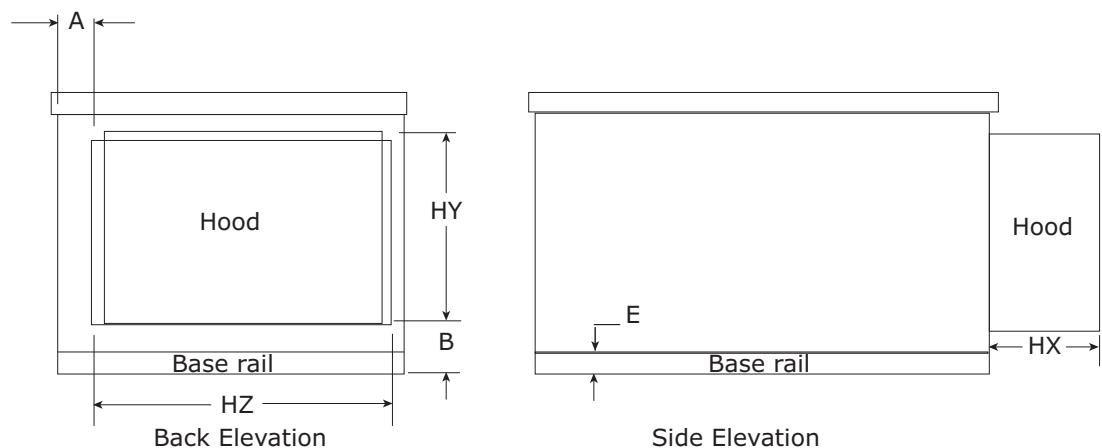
Vertical motorized impeller front/back hood dimensions (inches)
